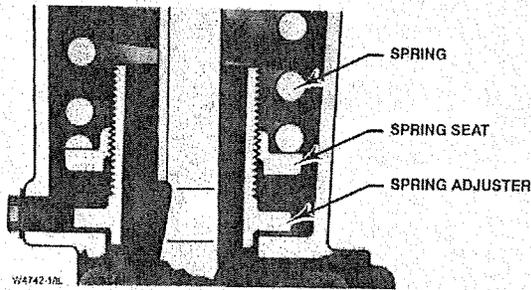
Typical Type 1052 Actuator Adjustable Spring Seat
